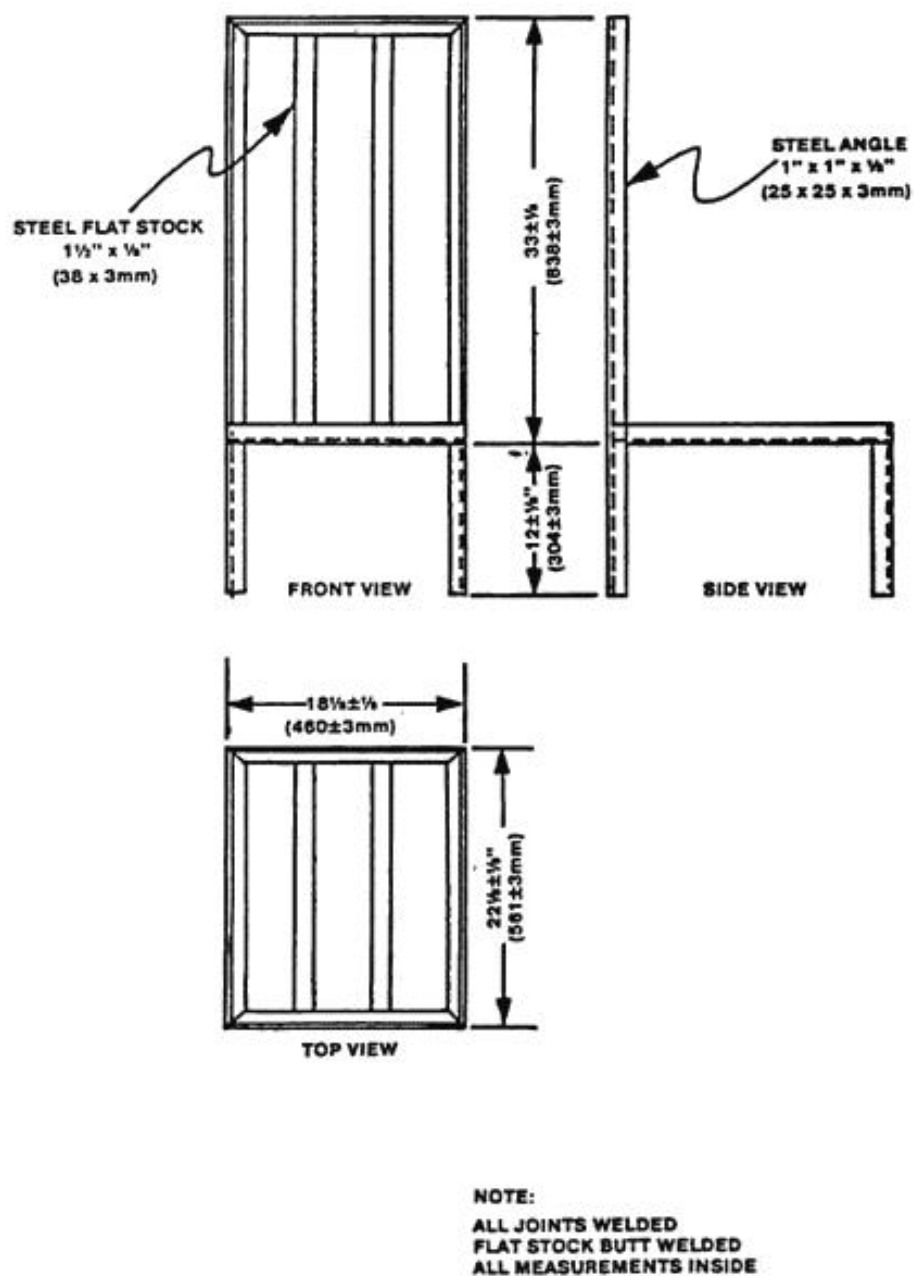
Dimensions of the FAR 25.853(c) seat frame
